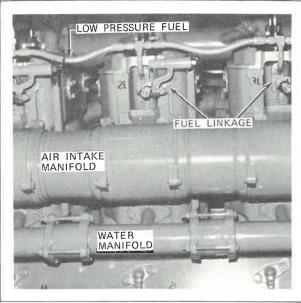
ENGINE DETAILS FOR MECHANICAL INSPECTION.
